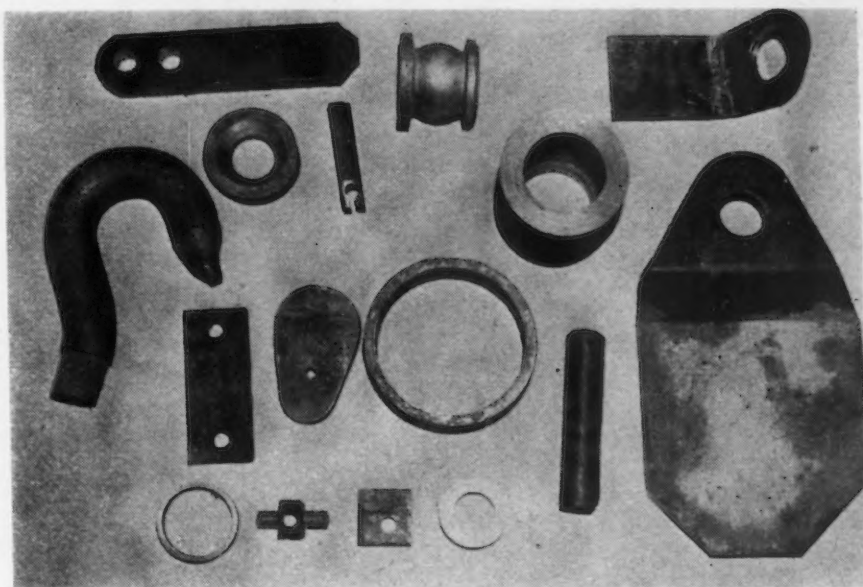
These parts are a few examples of pre-machined parts which will be welded into fabricated structures and will save machining of the entire structure because they are pre-machined. Note that they are taken from ordinary rolled steel bars, plates, shapes and tubes.
